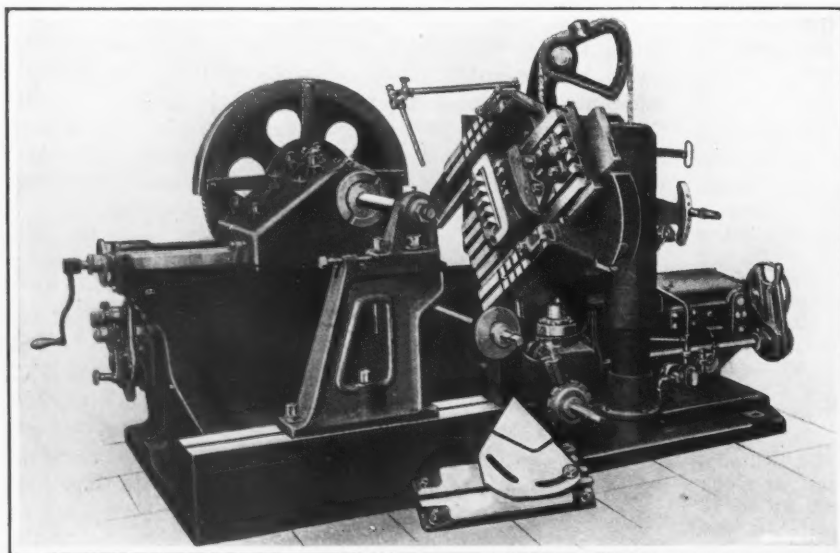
Generating Planer for cutting Helical or Spur Gears
